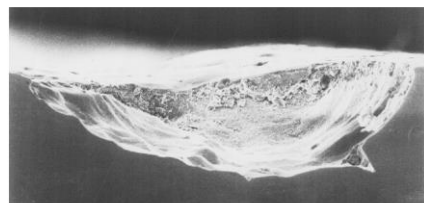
Pitting of the contact surface due to a subsurface crack growth
